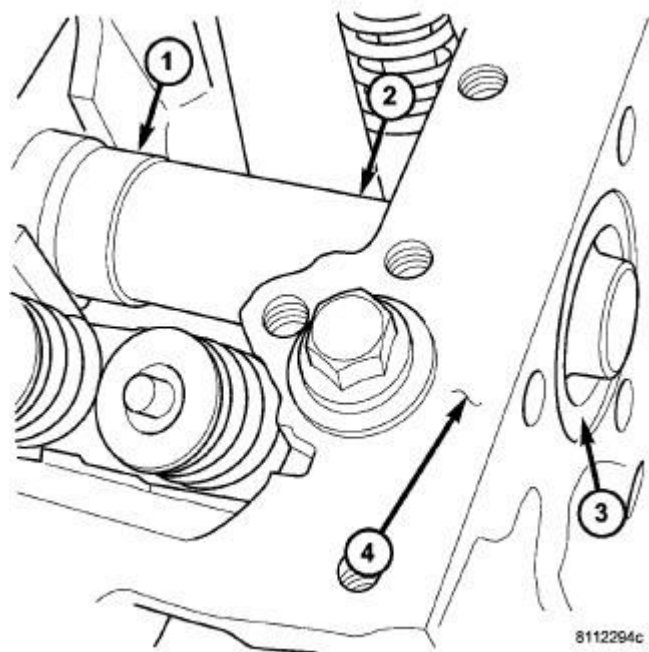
CAMSHAFT INSTALLATION - LEFT
